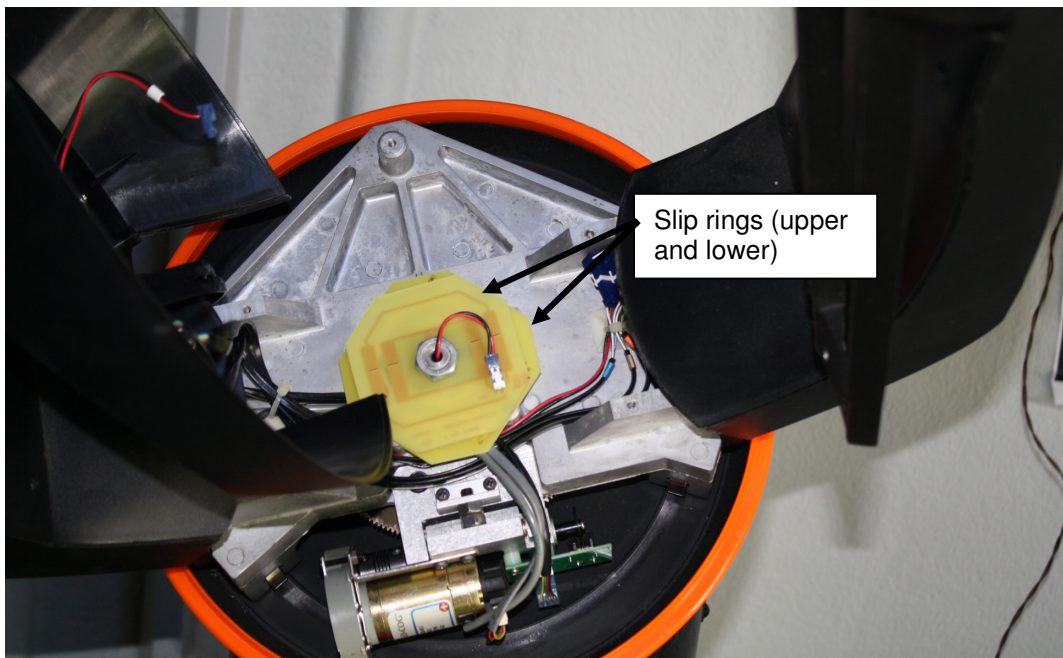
With cables disconnected from circuit board, control panel cover is free to be removed
